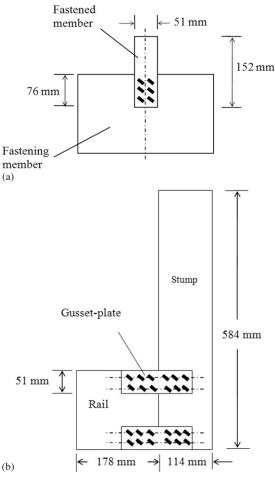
Staple placement of face-to-face oriented strandboard joints connected with two rows of six staples (a) and configuration of an L-shaped two-gusset-plate joint (b).
